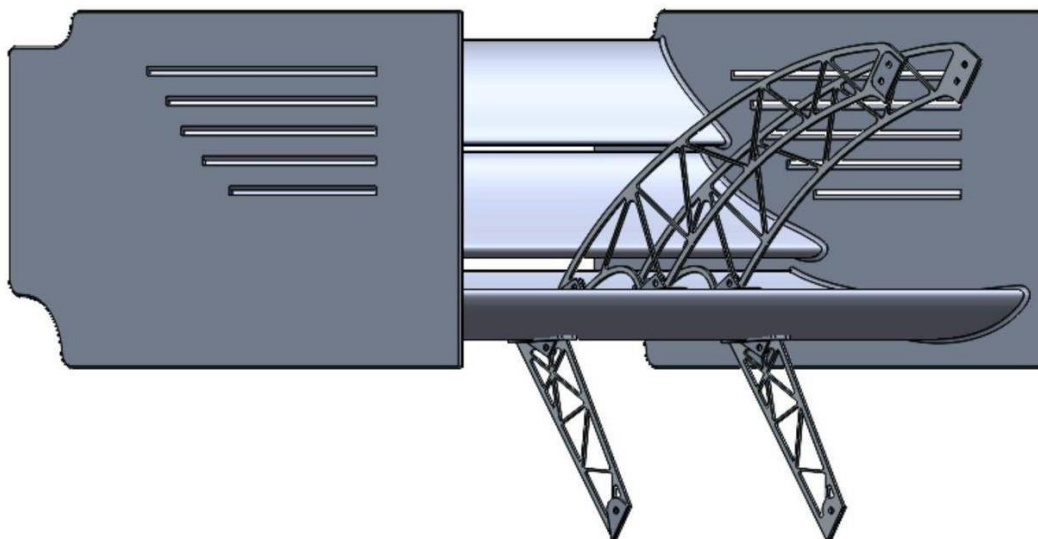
Assembly of the rear wing with the four supports (upper and lower). Taken from SOLIDWORKS.
